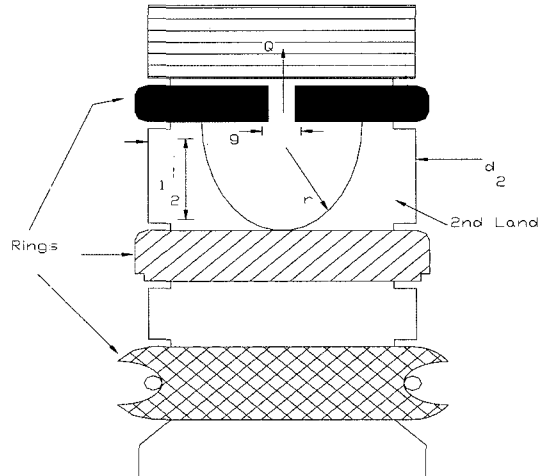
Side view of piston showing dimensions relevant to oil consumption.
